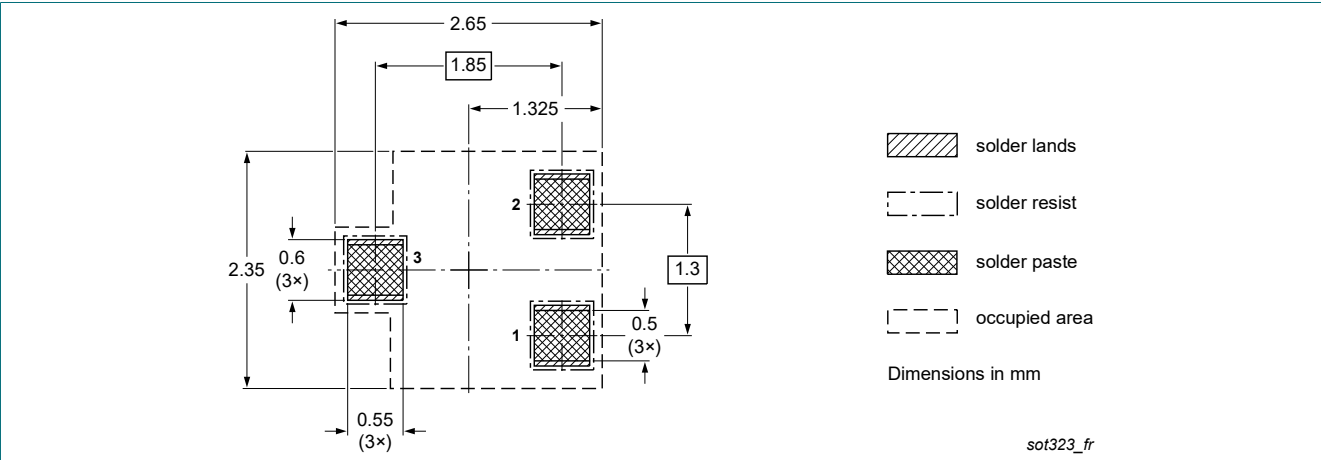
Reflow soldering footprint for SC-70 (SOT323)
